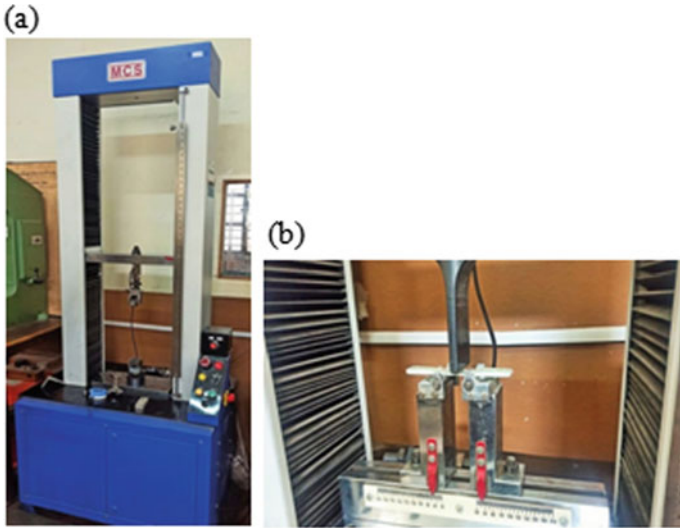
a UTM, b Three-point bending fixture specimen loading
